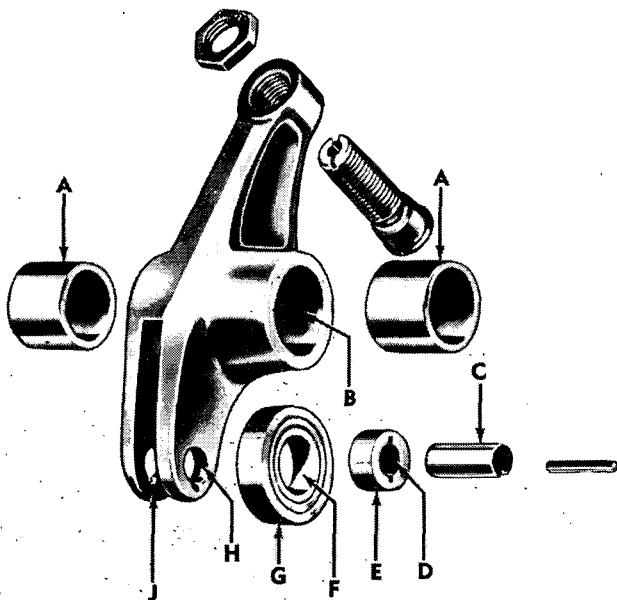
Repair and rebuild standard points of measurement for valve rocker assembly.
